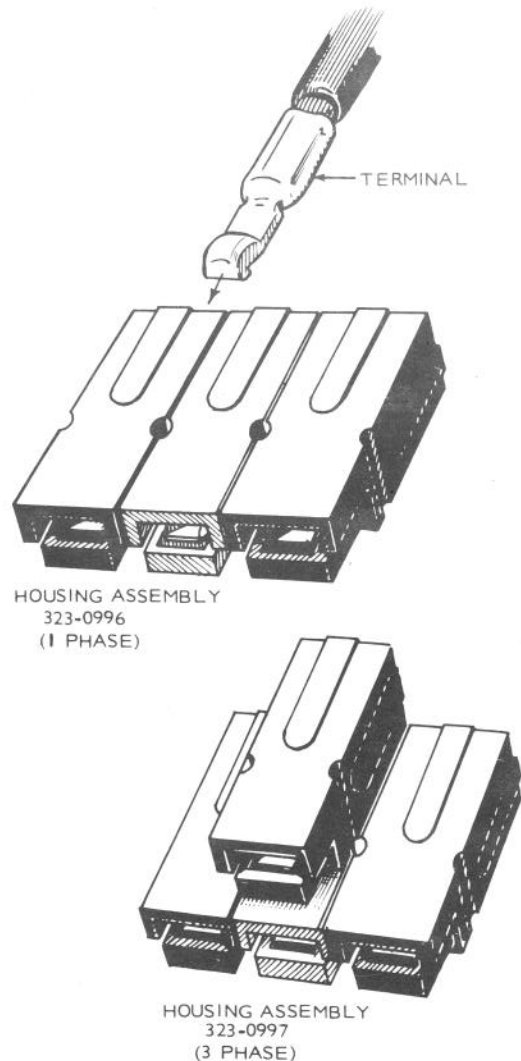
SINGLE AND THREE PHASE PLUGS
